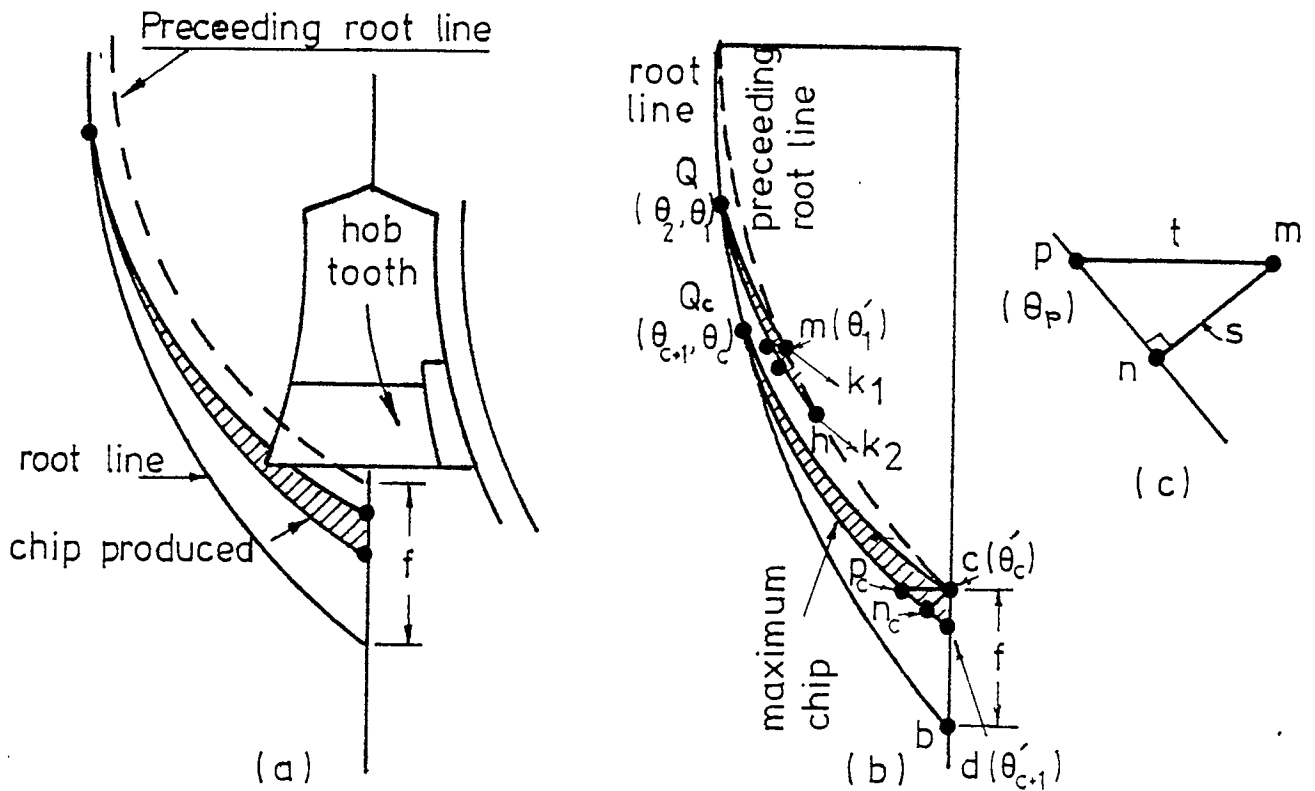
DIMENSIONS OF CHIP CUT OFF BY PERIPHERAL CUTTING EDGES
